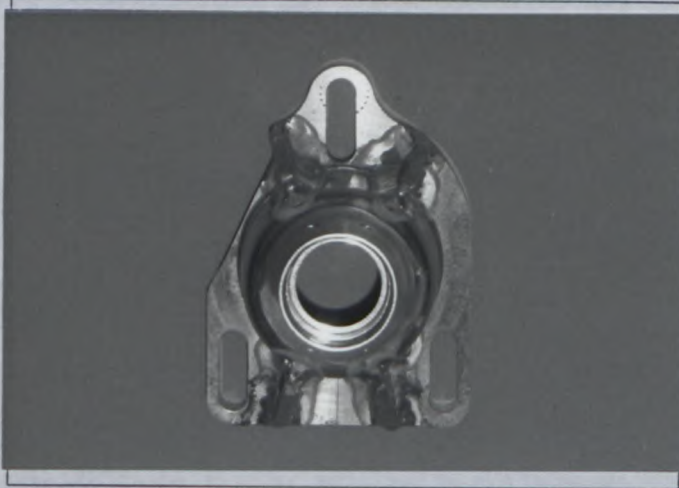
STABILIZER ASSEMBLY, TYPE B
